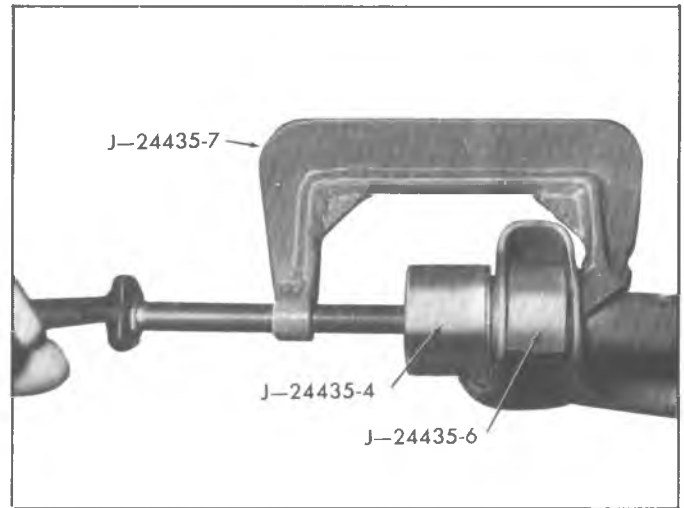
C—Lower Control Arm Rubber Bushing Installation
